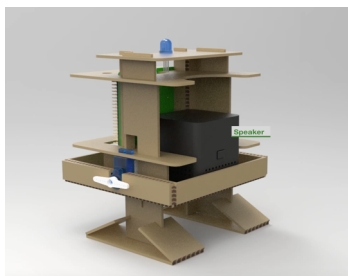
Rear view (top removed) showing speaker and the empty space for additional sensors.
